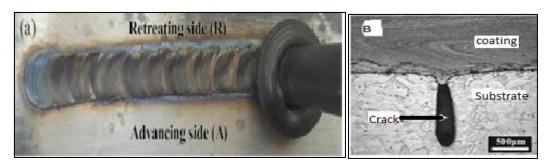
a) Inconel718 coating for crack repair b) Crack filling with Inconel718-optical image [14].
